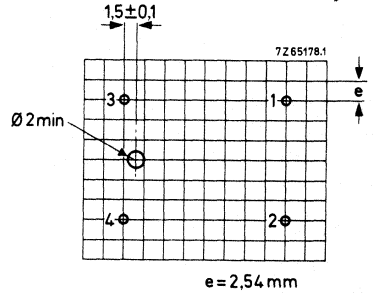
Hole pattern for mounting on a printed-wiring board, viewed from component side. Hole diameter $1,3 \pm 0,1$ mm.
